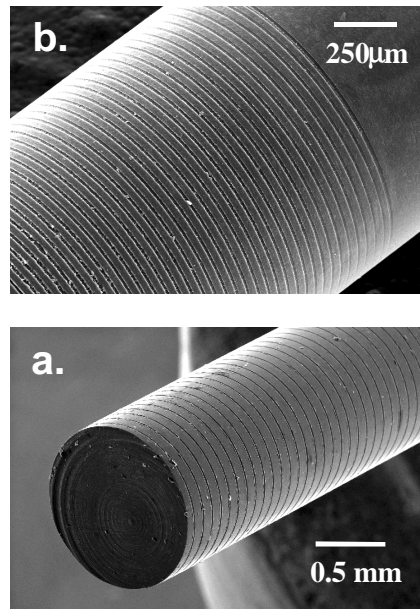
Cylindrical workpieces machined with lathe microtool. Helical grooves are fabricated into (a.) Al 6061 and (b.) PMMA.
